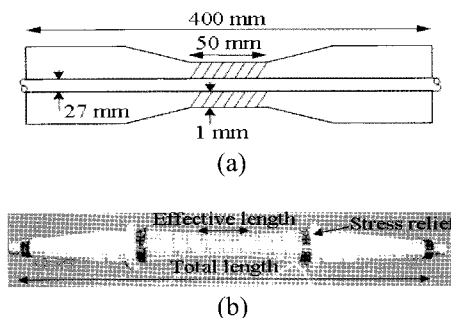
Manufactured mini-model cable for insulation test; (a) Schematic, (b) Photograph.
